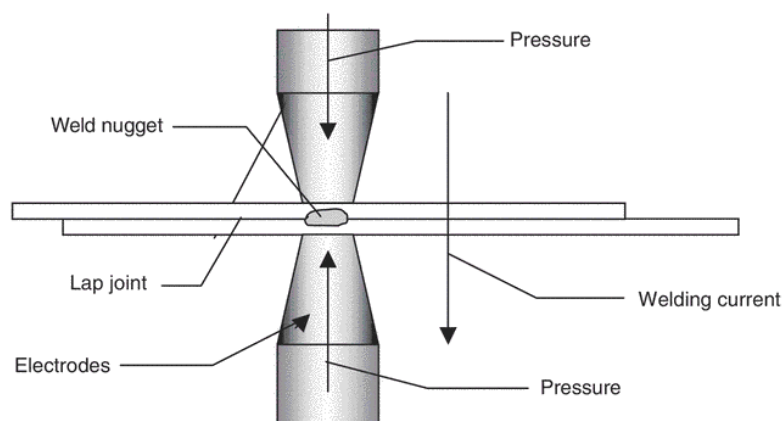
Principle of the spot welding (Mathers 2002, p.167)
